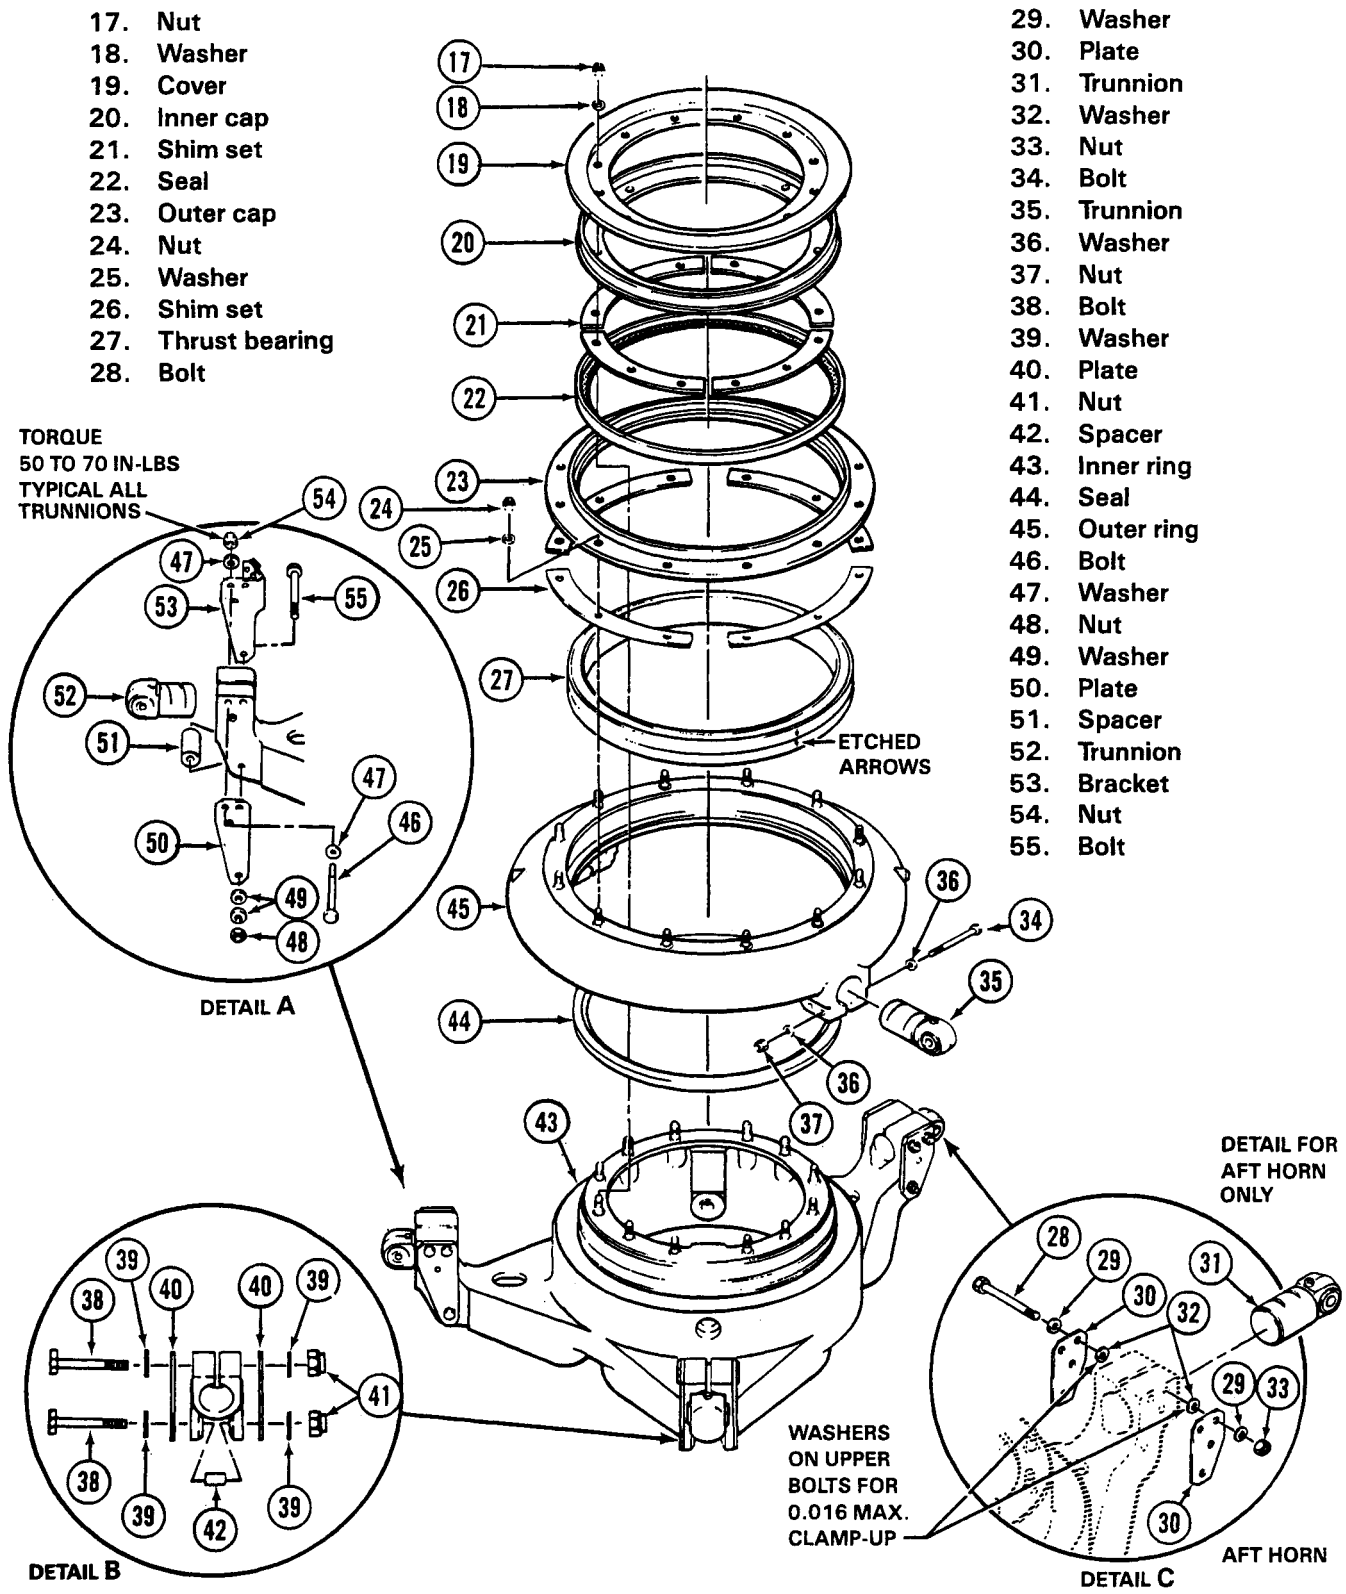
Swashplate and support assembly (Sheet 2 of 2)
